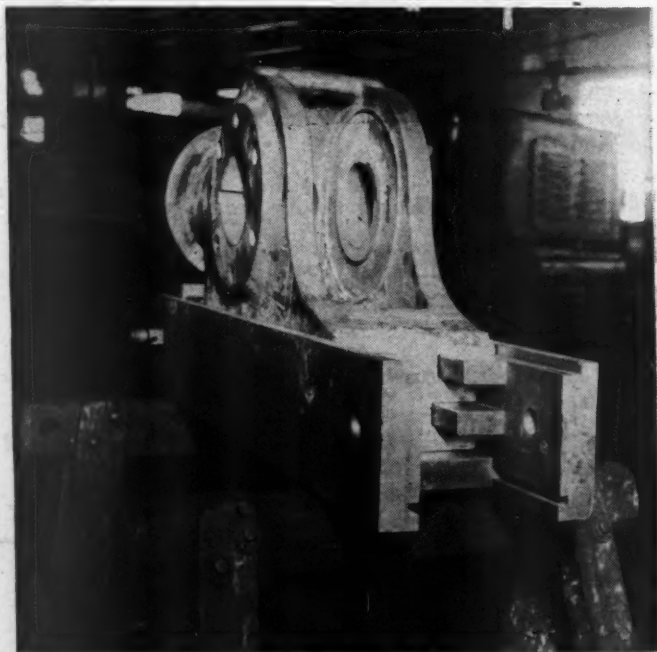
Machining is eliminated by this fixture for babbiting multiple-wear crossheads to required size—The jig has four pieces bolted together, two side plates, a top surface plate and an end gate—The plates are tongued and grooved
